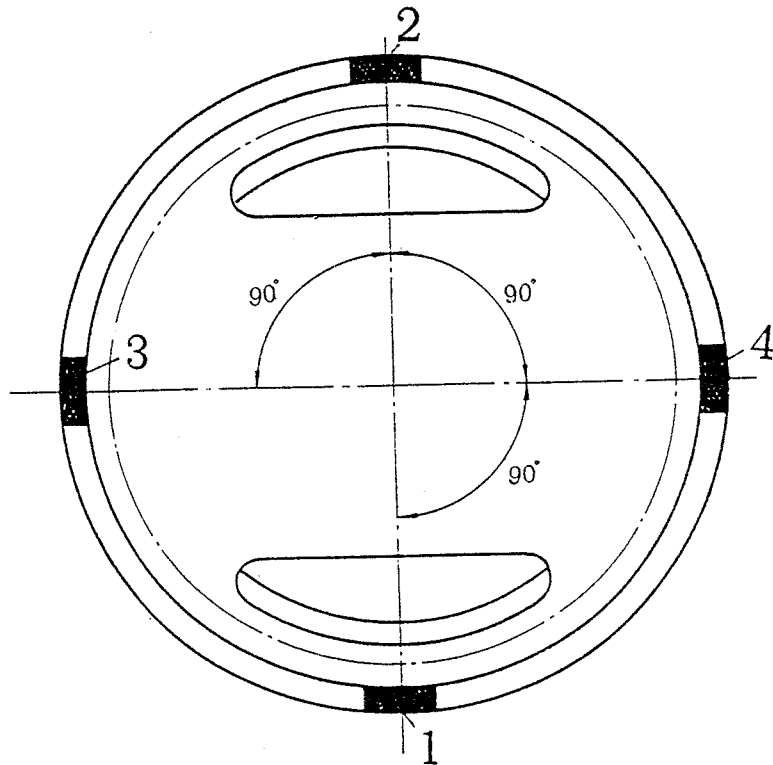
Scheme of Piston Ring Notch Position of Type-6 Piston Engine
